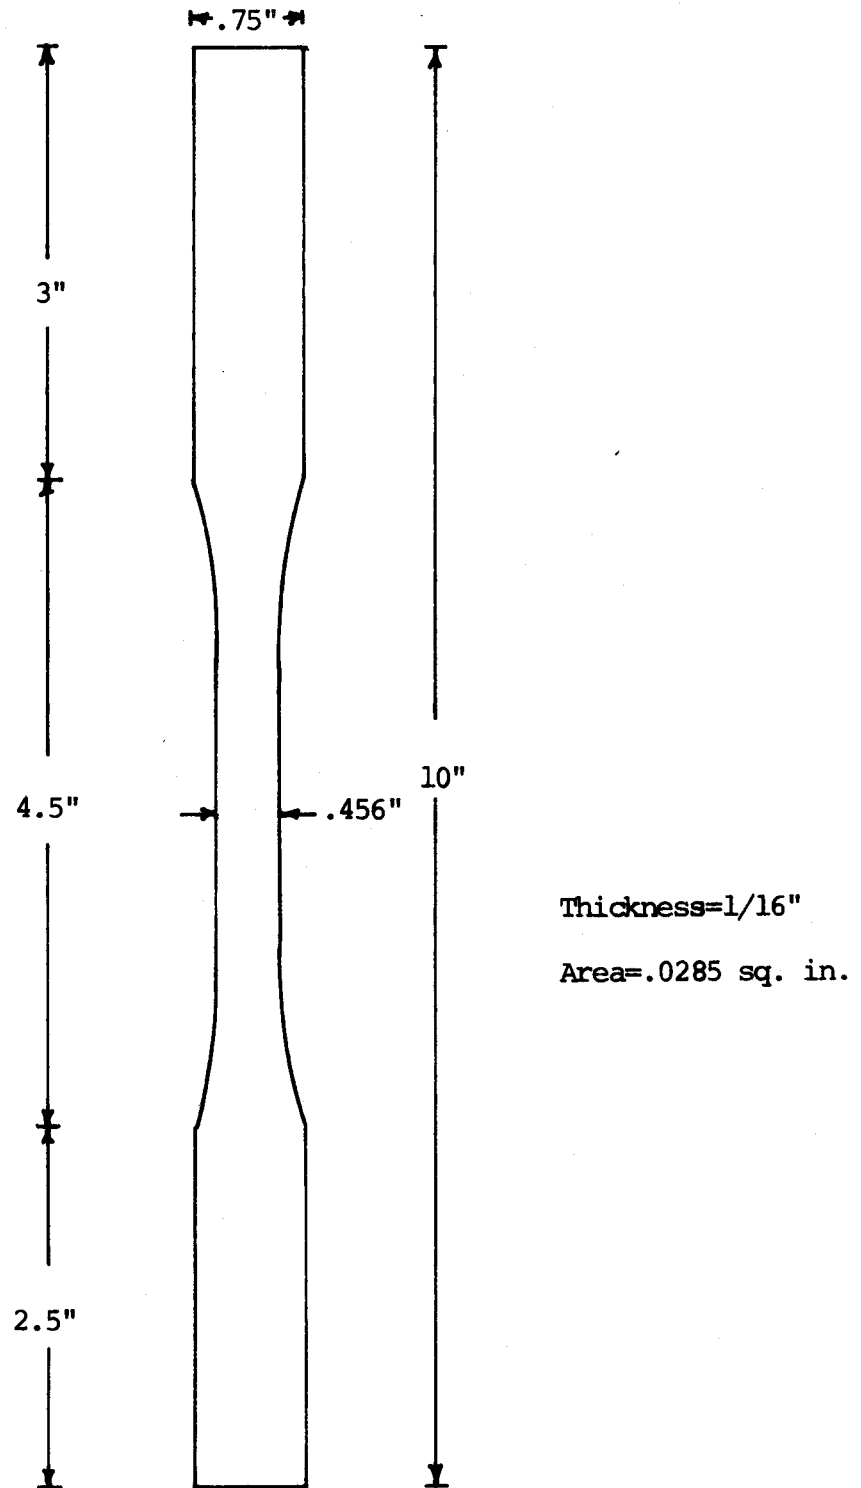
DIMENSIONS OF THE TENSION SPECIMEN
